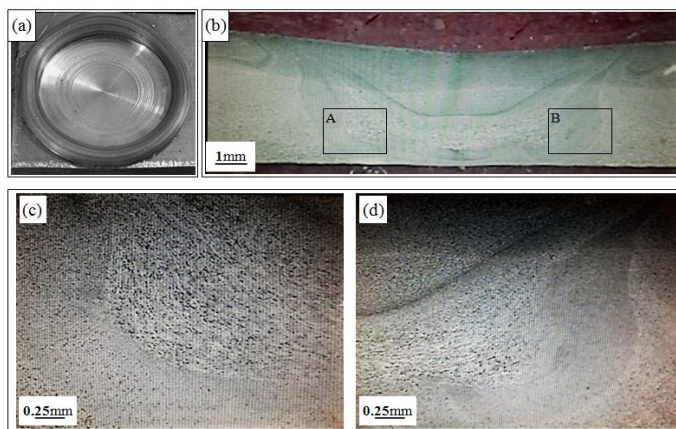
Macrostructures of a cross-section of refill FSSW specimen, (a) a top view of the weld, (b) a cross-sectional view, and (c, d) close-up views of regions A and B marked in (b), respectively.
